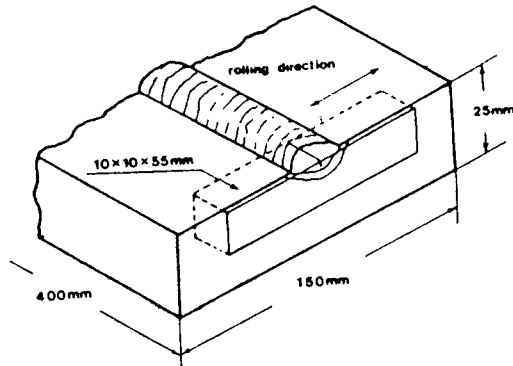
Welding plate configuration and extraction of specimen.
